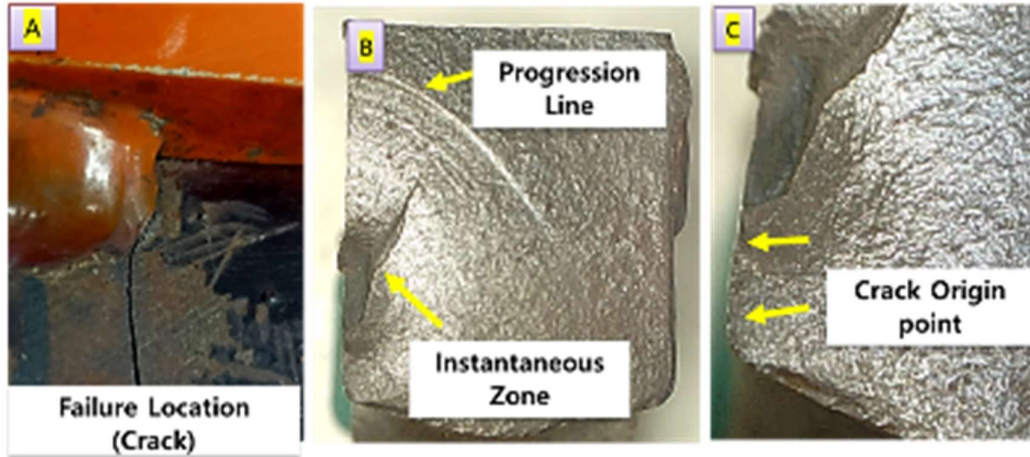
Details of fracture surface investigation were explained. A: Crack location marking on fillet joint. B: Identification of Instantaneous zone and progression line. C: Identifying crack origin point.
